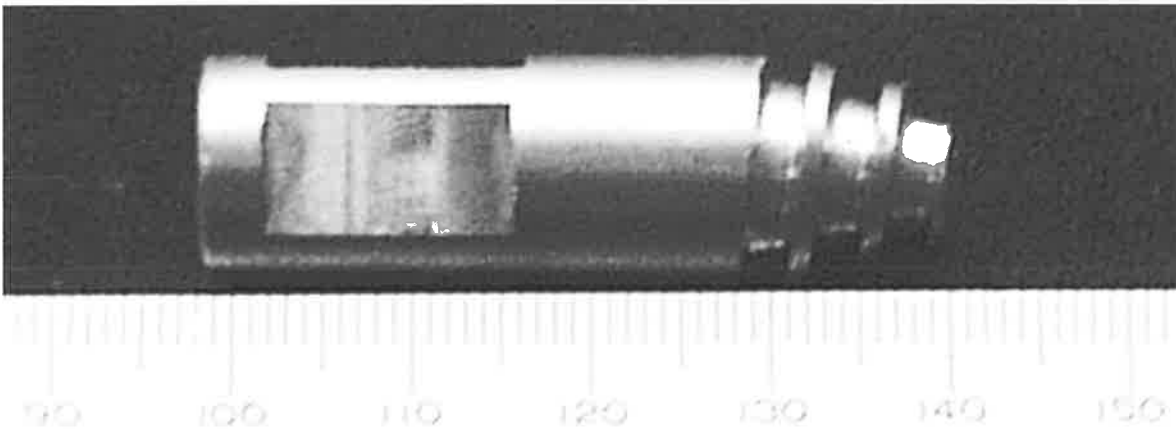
Tool pin CT1-14: conical and threaded pin, with no flats. This tool pin was used in conjunction with tool shoulder 30Cc14: concave 30mm diameter shoulder.
